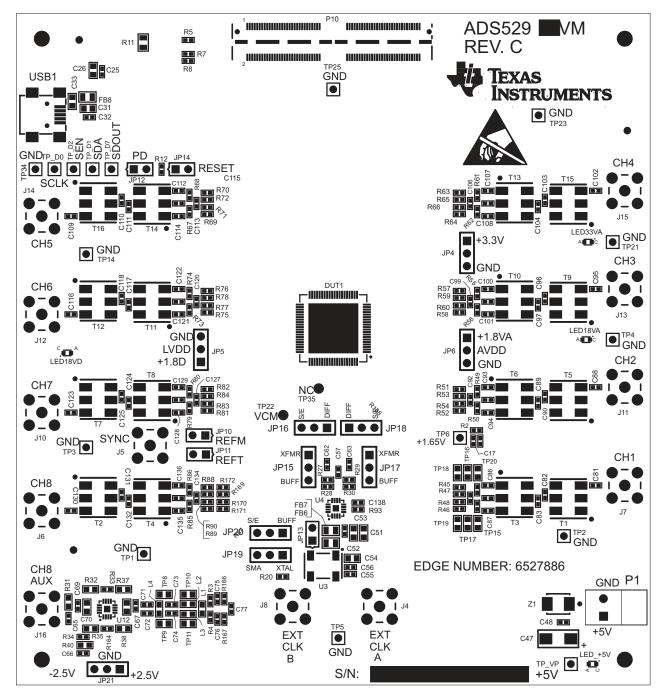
ADS5294EVM Top Layer Assembly Drawing - Top View
